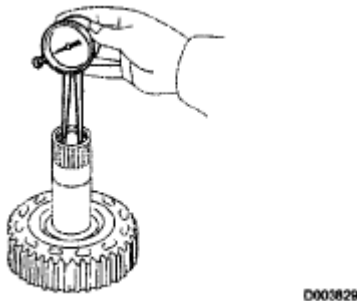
Measuring Inside Diameter Of Forward Clutch Hub Bushing
